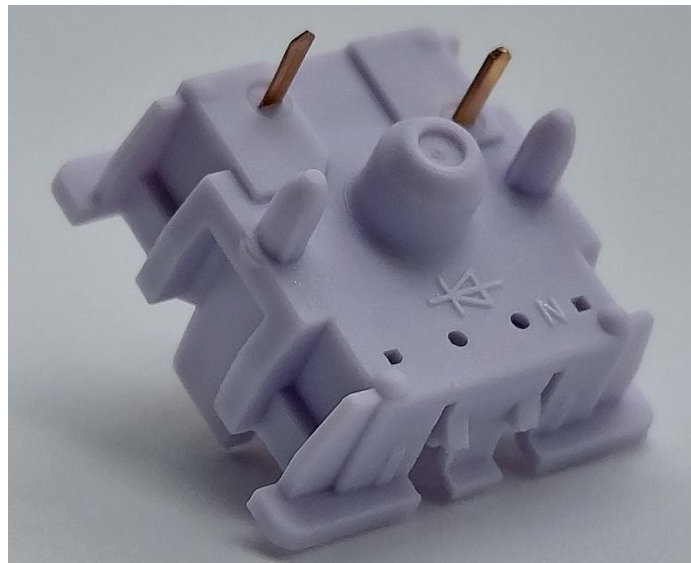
Bottom side of Hippo bottom housing showing raised mold letter as well as diode symbol.
